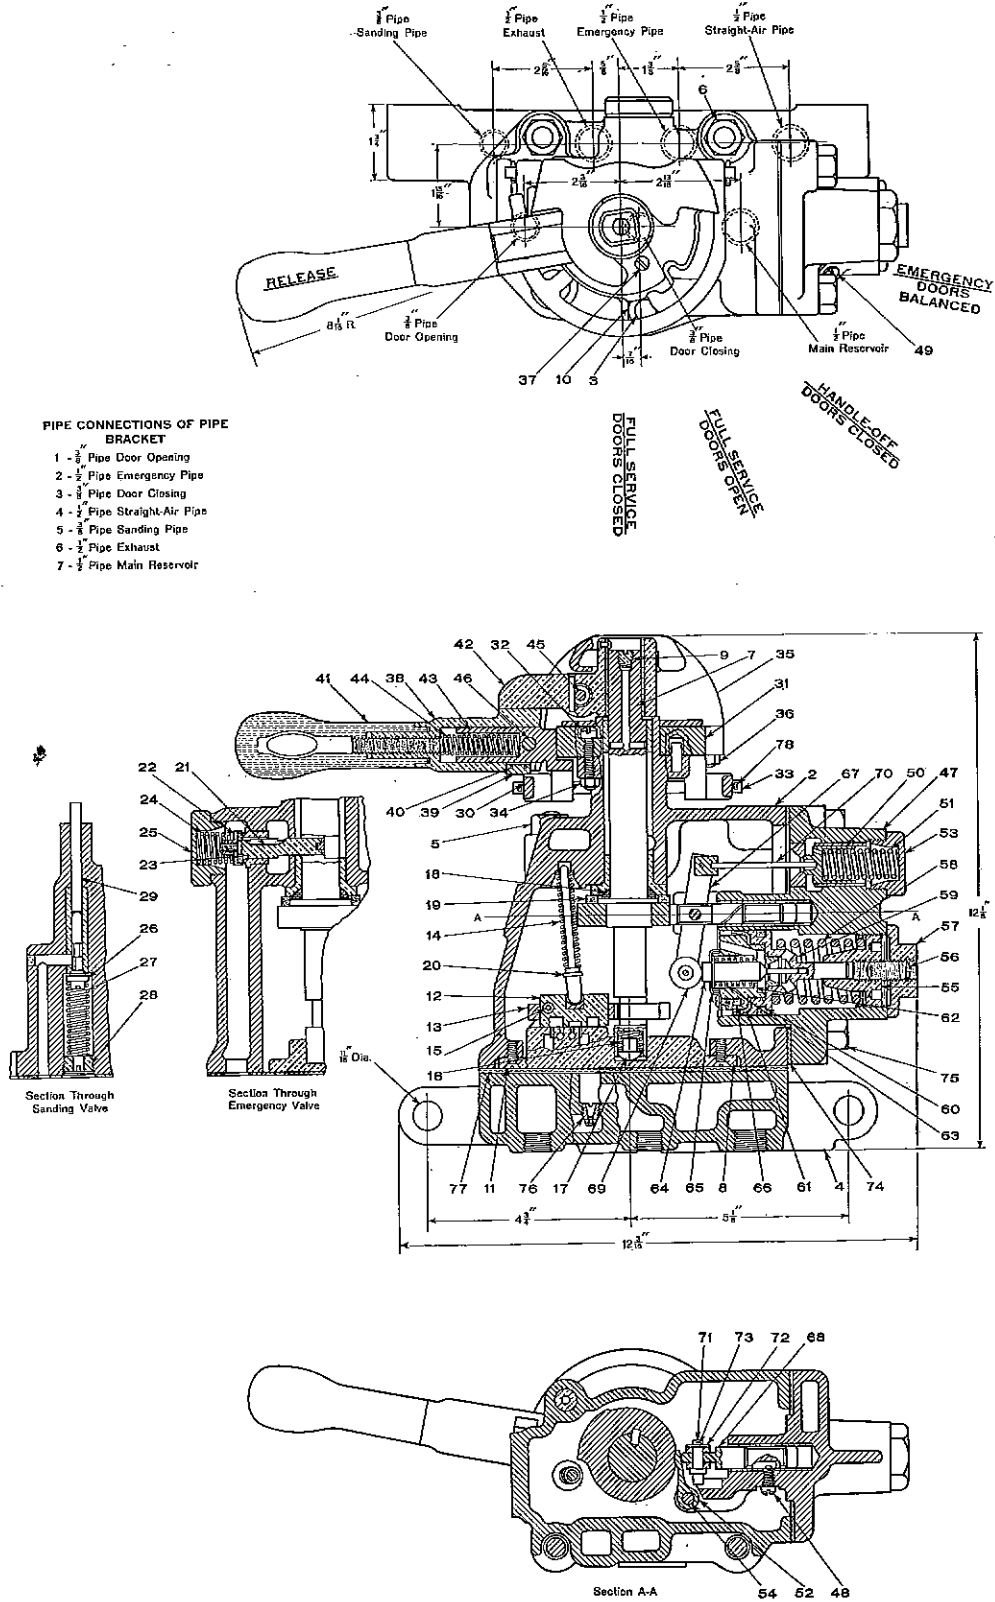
M-35 Self-Lapping Brake Valve, Assembly
